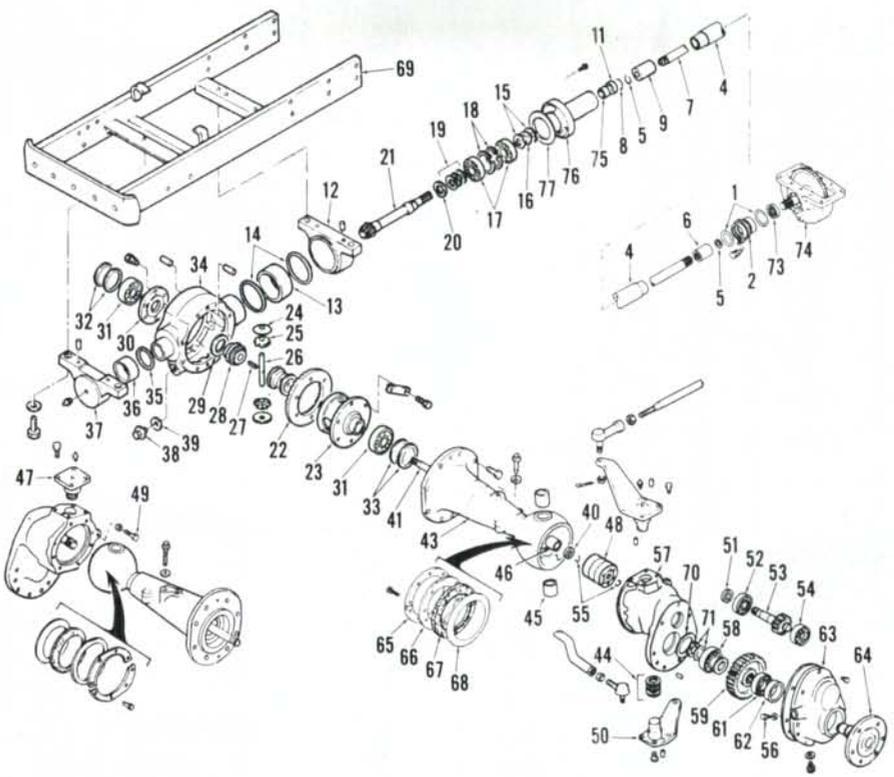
Exploded view of front wheel drive axle assembly typical of type used on 1500 and 1700 models. The front wheel drive axle used on 1900 models is similar.
